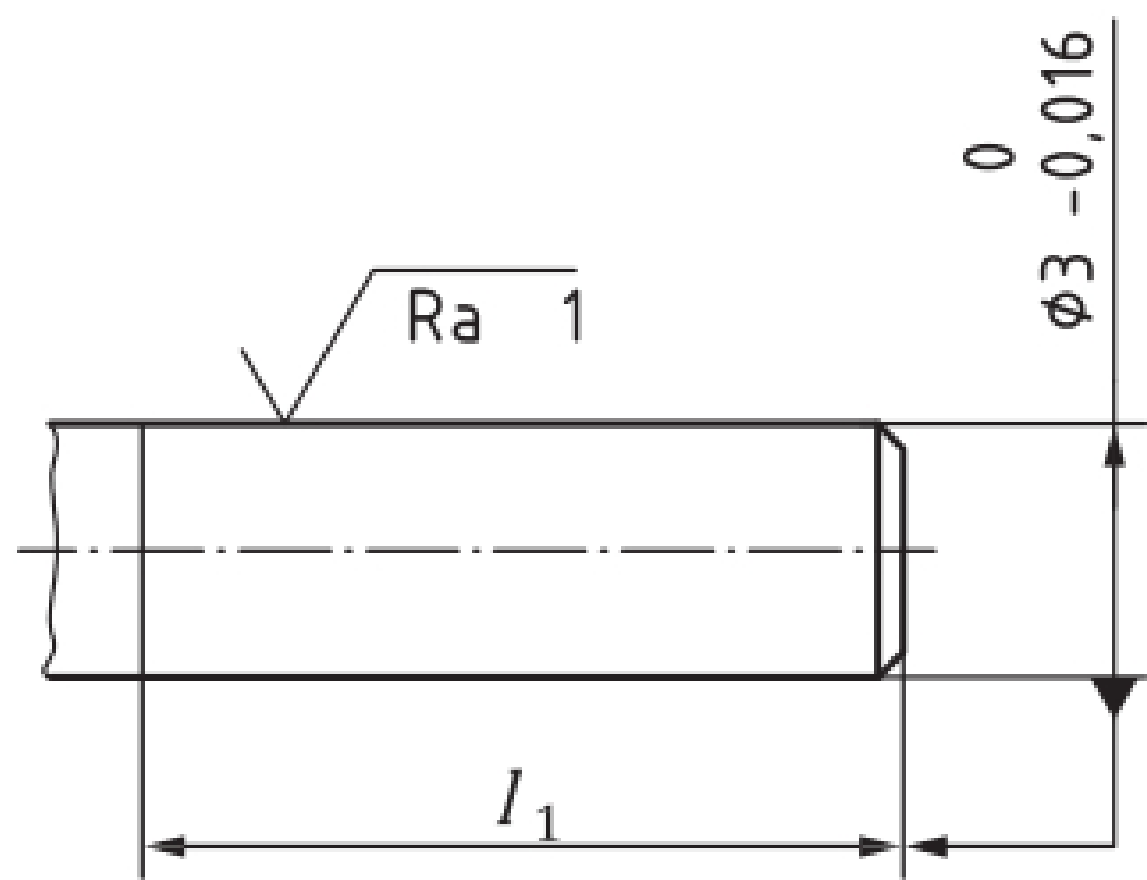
Dimensions, tolerances and surface roughness for Type 4 shank
